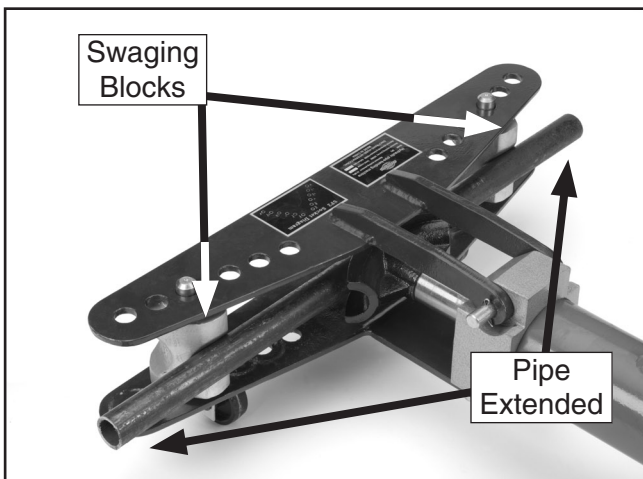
Pipe installed beyond swaging blocks to account for pipe shortening during the bend.
